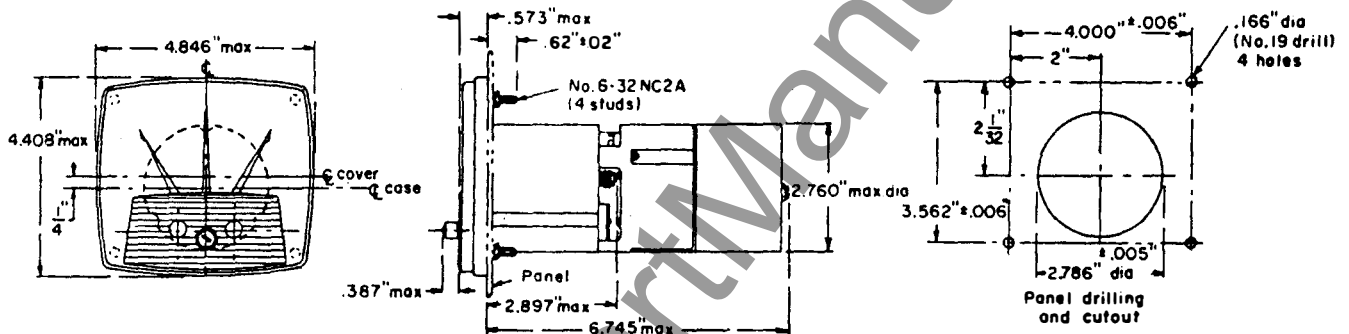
Outline and panel cut-out dimensions for Type 195 meter relay, 4 1/2-inch with control unit piggy-back mounted.
